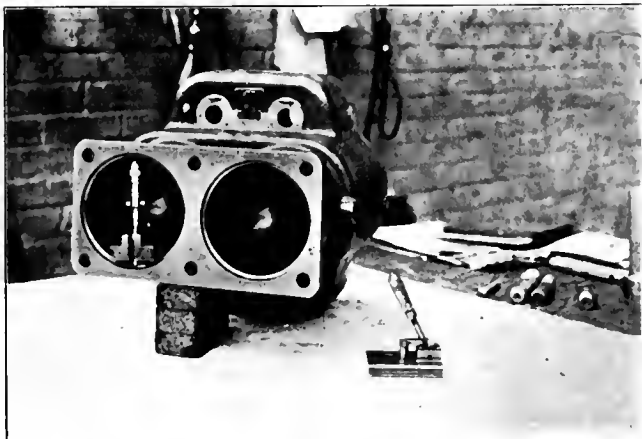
Micrometer Gage for Testing the Size, Roundness and Parallelism of the Cylinder Bores
